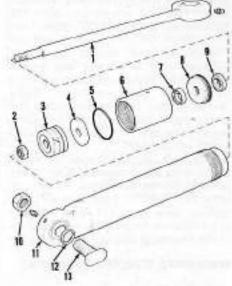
Exploded view of second type steering cylinder used on Model 1690 tractors. Note differences in end cap and seal design from cylinder shown in Fig. 43.
